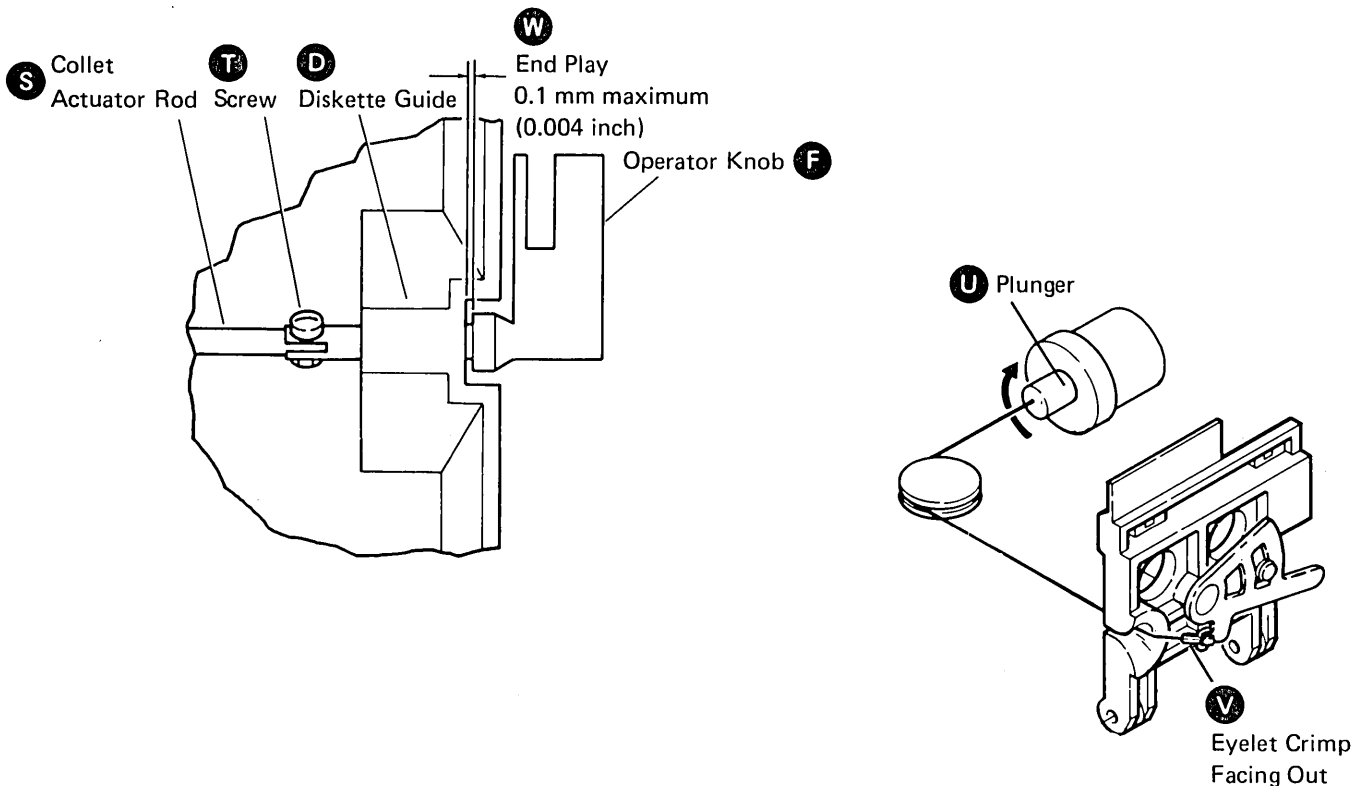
(Part 2 of 2). Collet/Flat Spring Removal
